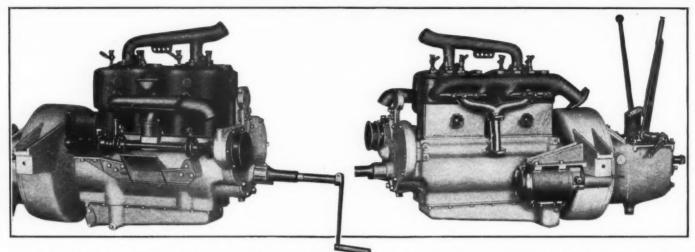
Complete power plant and transmission including Carter piston valve motor
